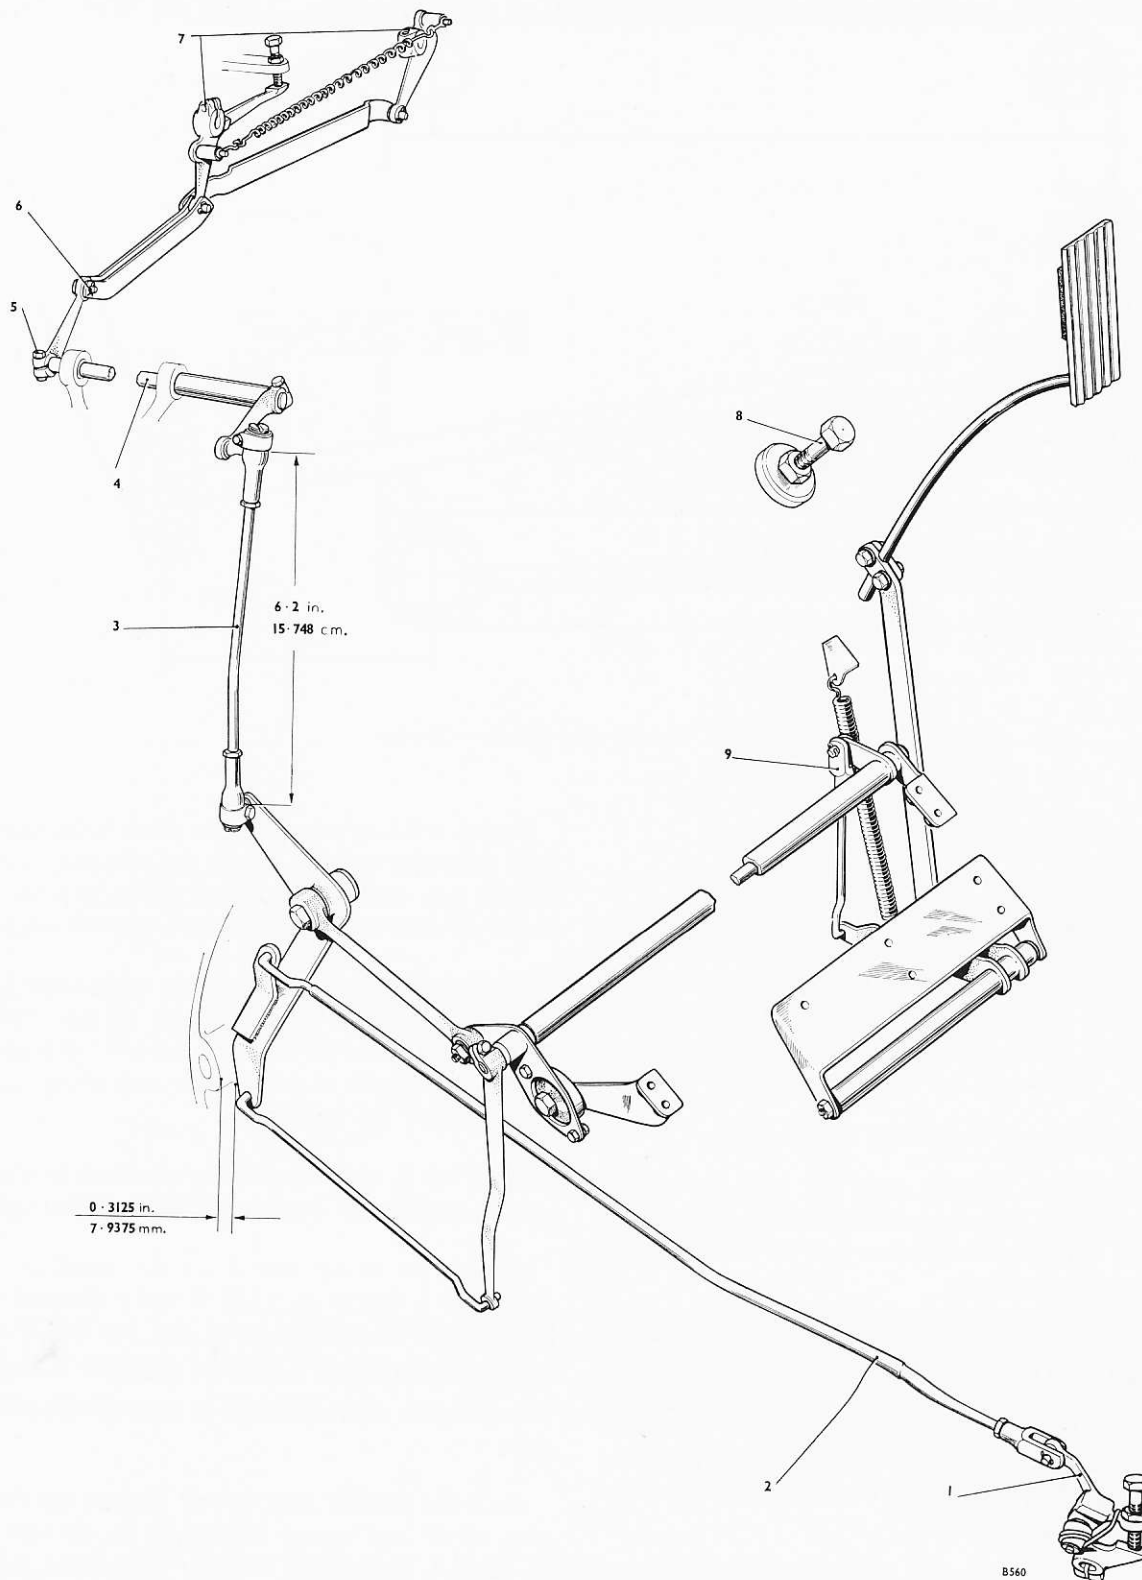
Throttle linkage right-hand drive — late S2 cars
